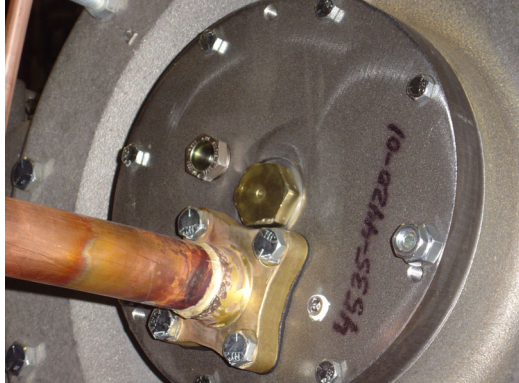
New design Bearing Inspection Cover with new design Grounding Brush installed.
